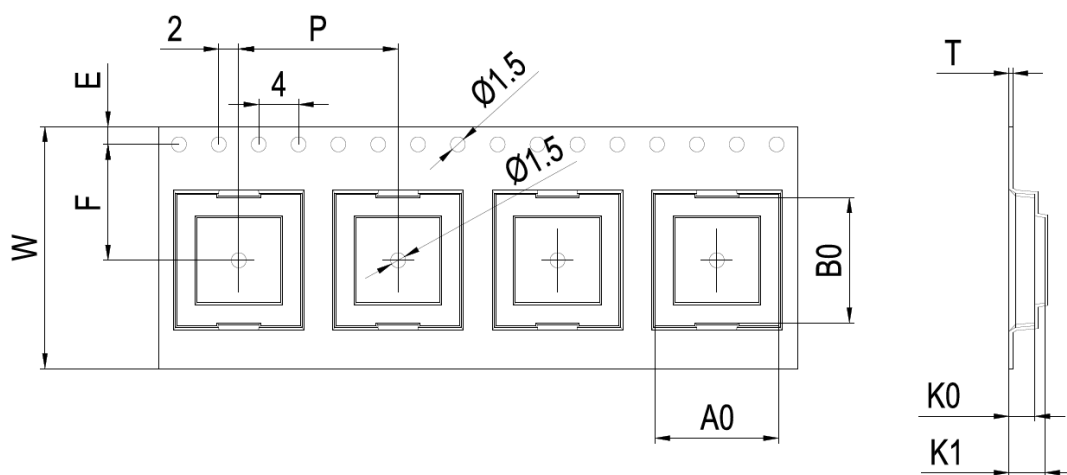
Carrier Tape Dimension Drawing (Unit: mm)
